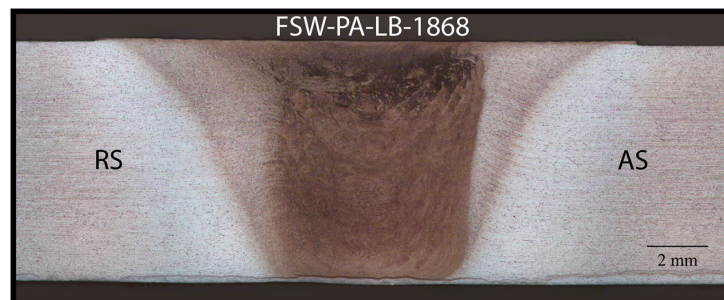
Macrograph of the weld FSW-PA-LB-1868 (25 kN).
